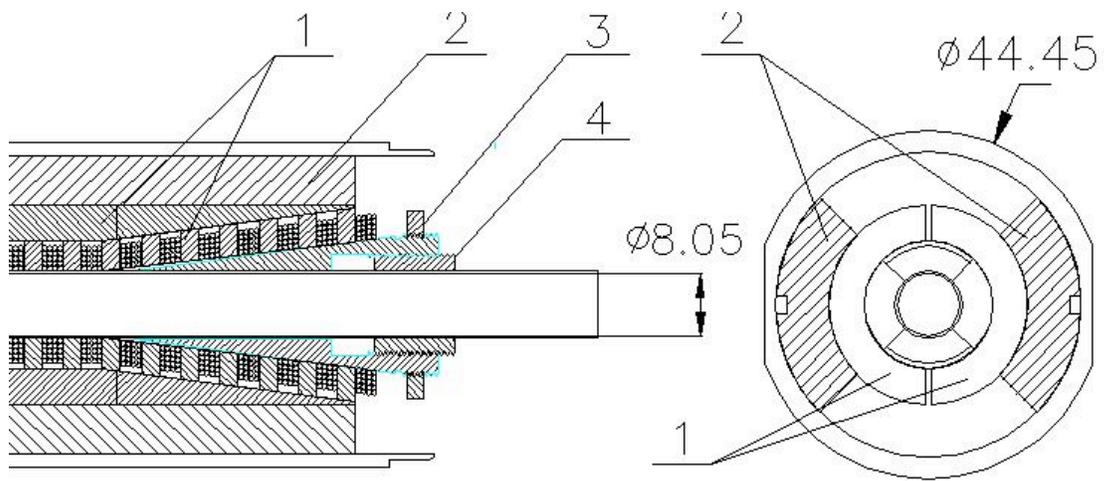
Details of cold mass design at the fringe with conical tapering. 1–Iron yoke, 2–Copper collar, 3, 4–trimming Iron nuts. Inner diameter of Copper vacuum chamber is 8.05mm clear.
